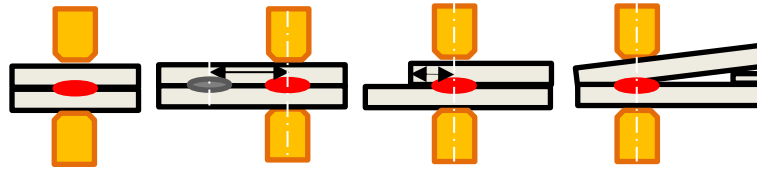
Representation of a Standard, Shunted, and Edge Weld (from Left to Right)
